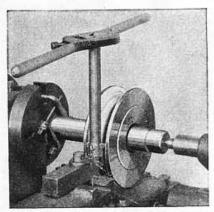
Making a Pipe Bending Roll on a 16-inch Lathe
